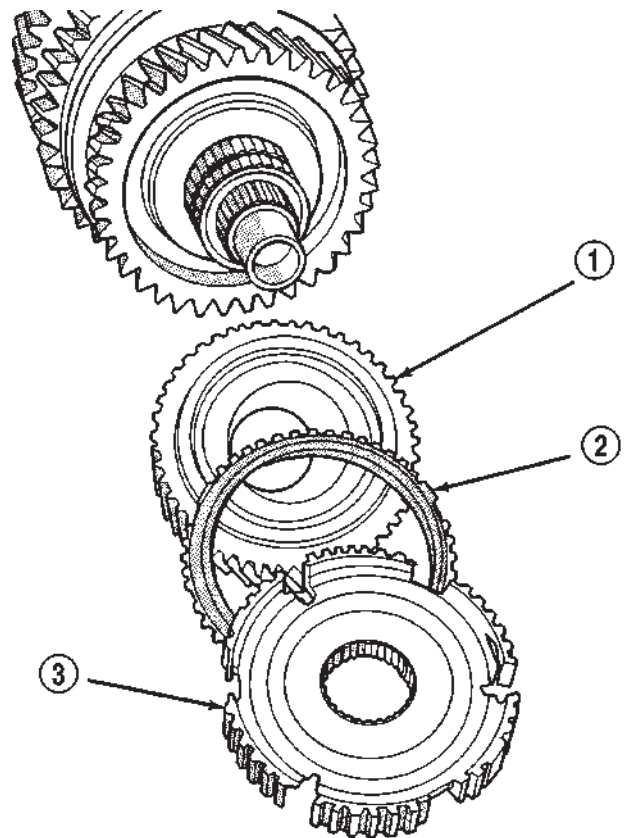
Third Gear, Stop Ring, And 3-4 Hub
